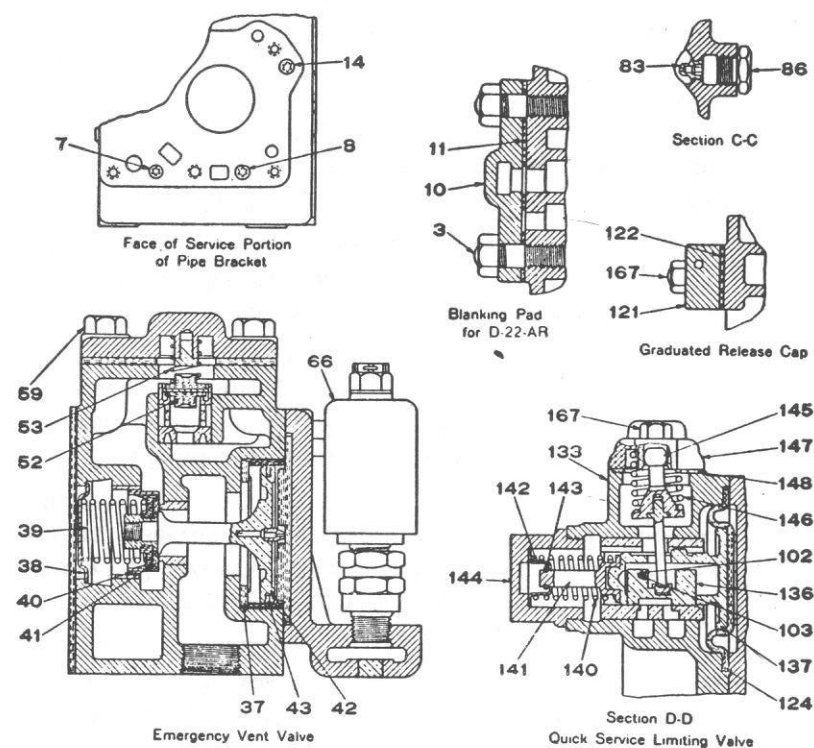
Sectional Views of D-22-AR Control Valve Details
